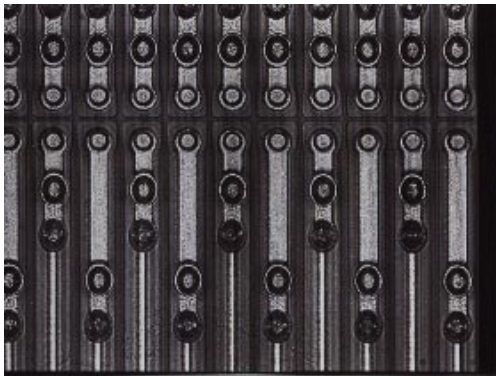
Top view of one of the 4 metal feed through configuration (video print)
